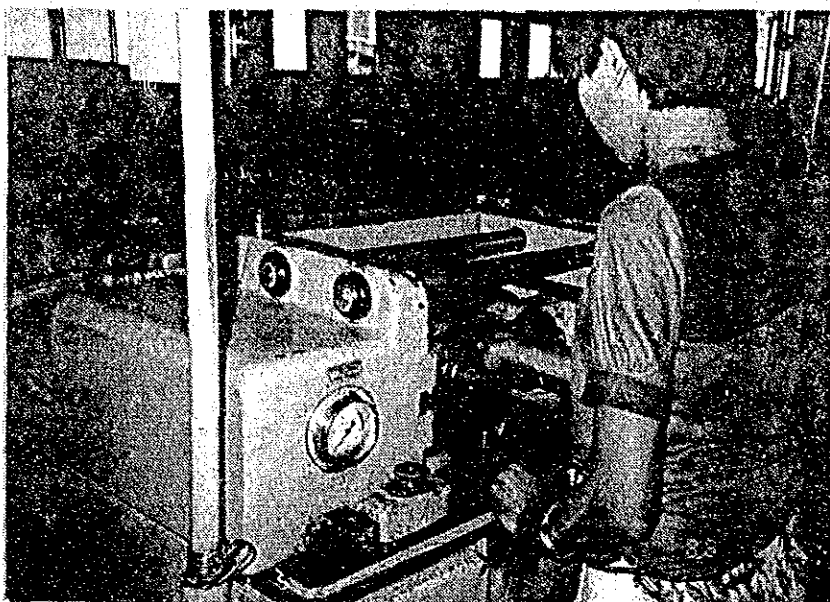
shows workers are putting the hand inside rotary machines during the machining work being carried out at the bolt/nut shop, and this is very dangerous.
